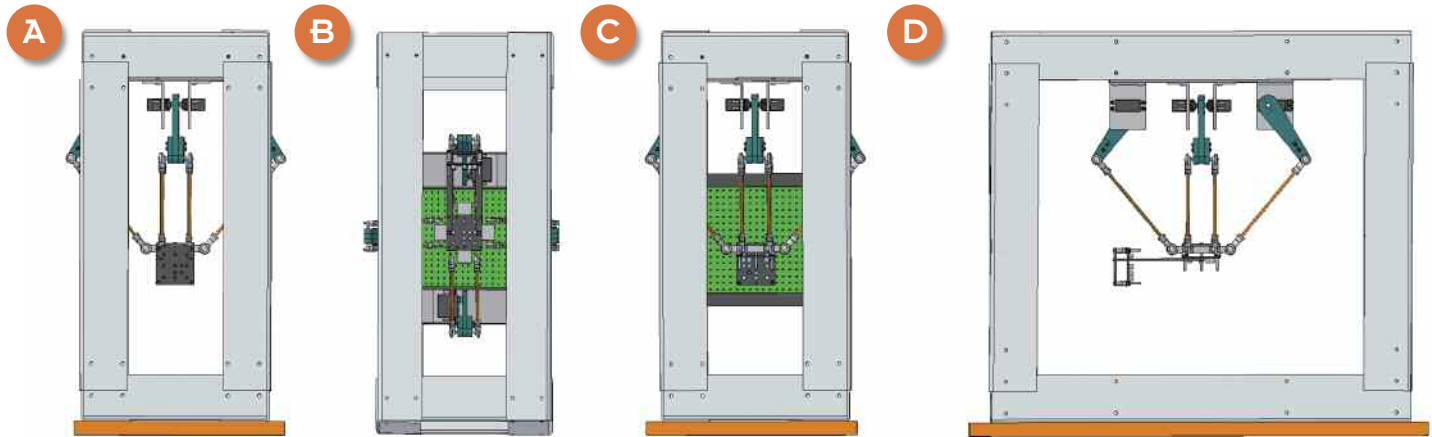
Final design incorporating real component models. a. Front view b. Bottom view (with base removed) c. Back view d. Left-side view
